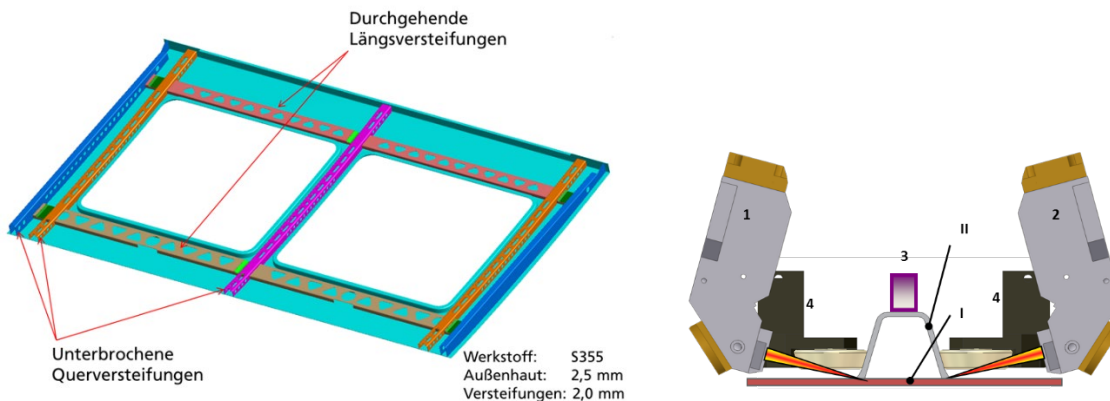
Light-weight design conception, developed for simultaneous laser welding and sketch of welding process for closed stringers
